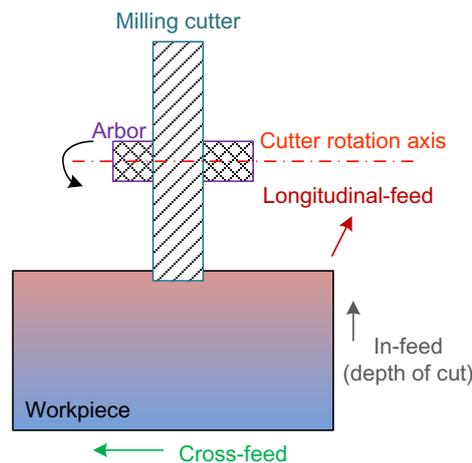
Schematic diagram showing peripheral milling and relevant cutting parameters
